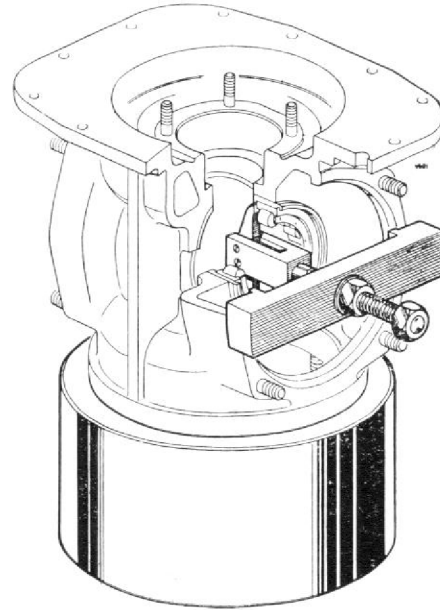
Extractor T.78408 for removing the upper vertical drive outer roller race.
